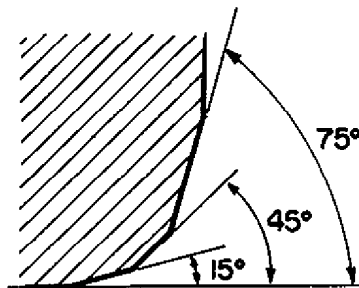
A-87 Valve Seat Angles for Exhaust Valve
